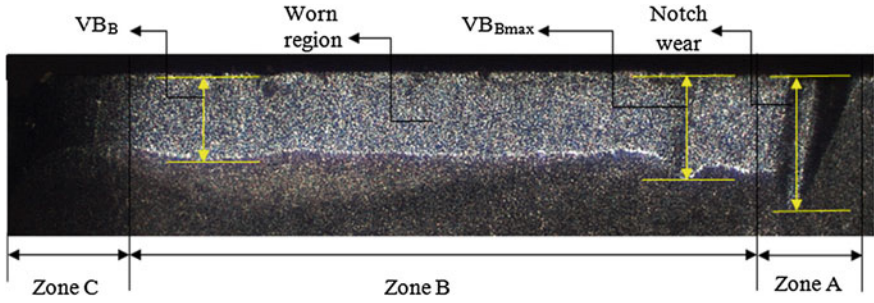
Flank wear profile of an worn out cutting tool insert
